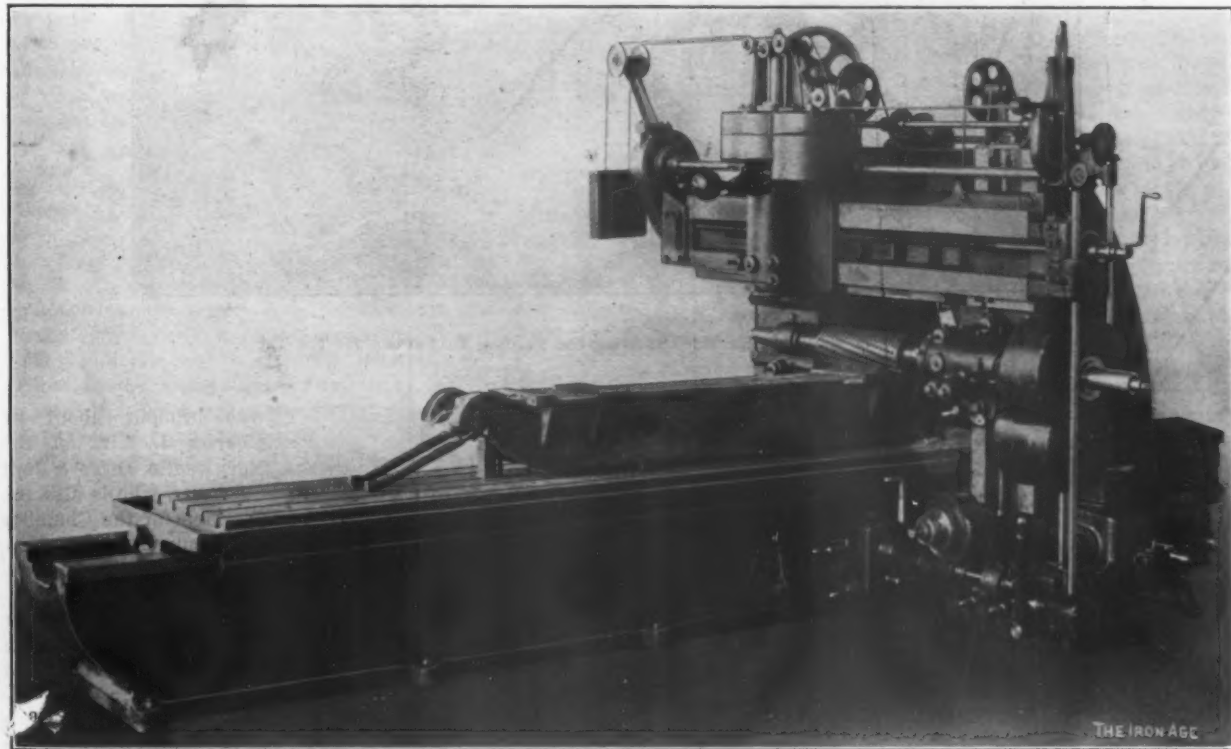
The Operating Side of the Ingersoll Combined Horizontal and Vertical Spindle Milling Machine.
